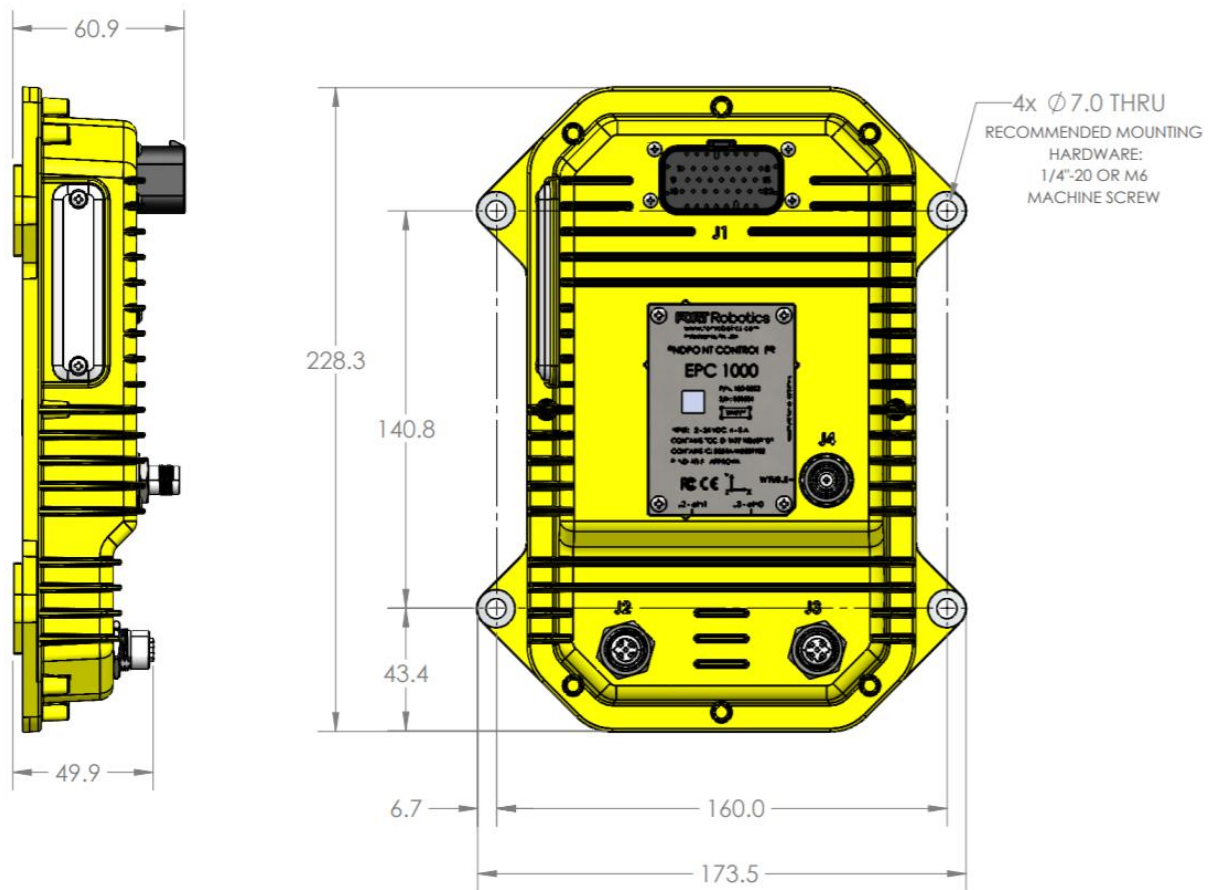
EPC 1000 (Bluetooth/WIFI only) Mechanical Drawing (all dimensions in mm)
